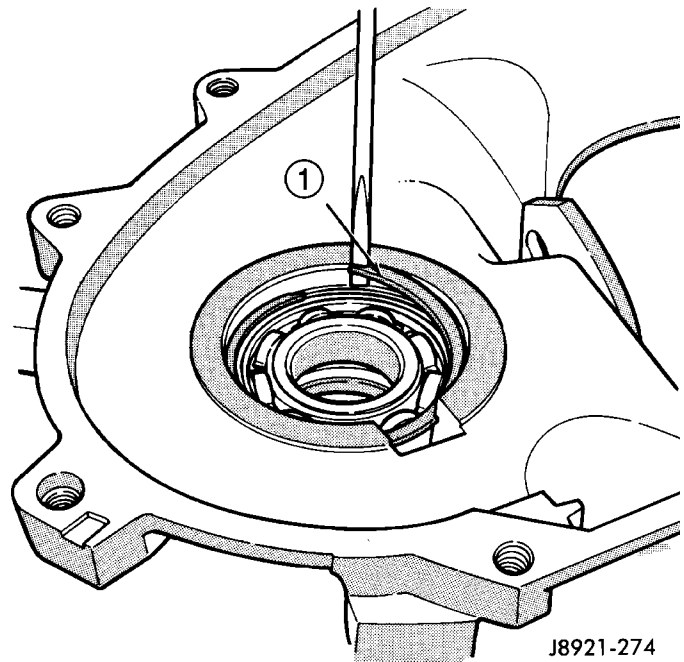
Front Output Shaft Front Bearing Snap-Ring Removal
